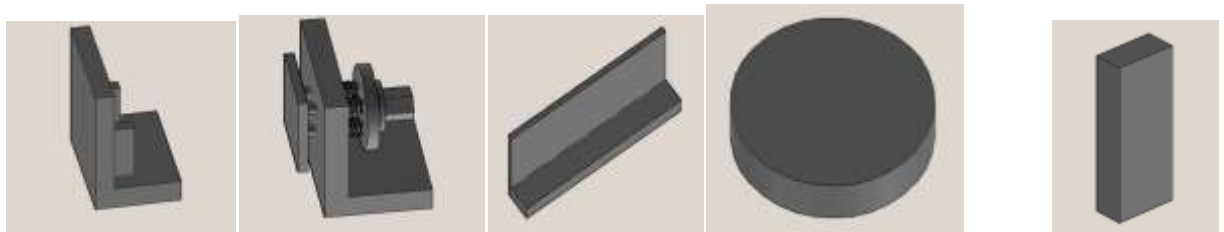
supporting plate 1 and 2 Fig 3.4.2 supporting channel Fig 3.4.3 Chuck Plate Fig 3.4.4 Supporting strip
